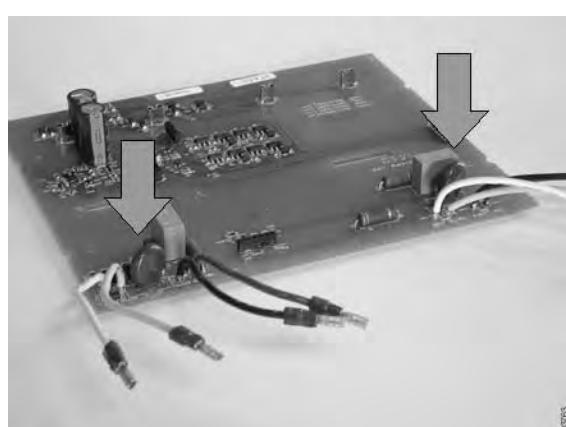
MOV location on Interface PCB (75 kW ~ 110 kW models)
